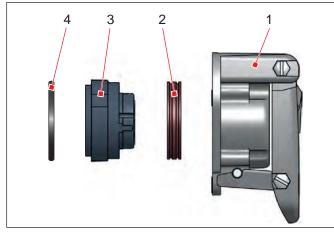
Spare parts for UIC 558 receptacles with socket insert
